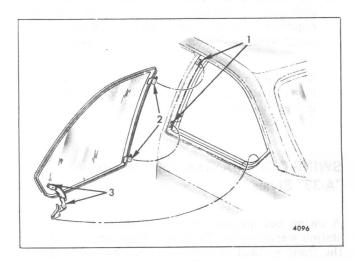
Optional Swing-Out Quarter Window Removal - "H-11 and 77" Styles Shown ("X-17,27" Styles Similar)
